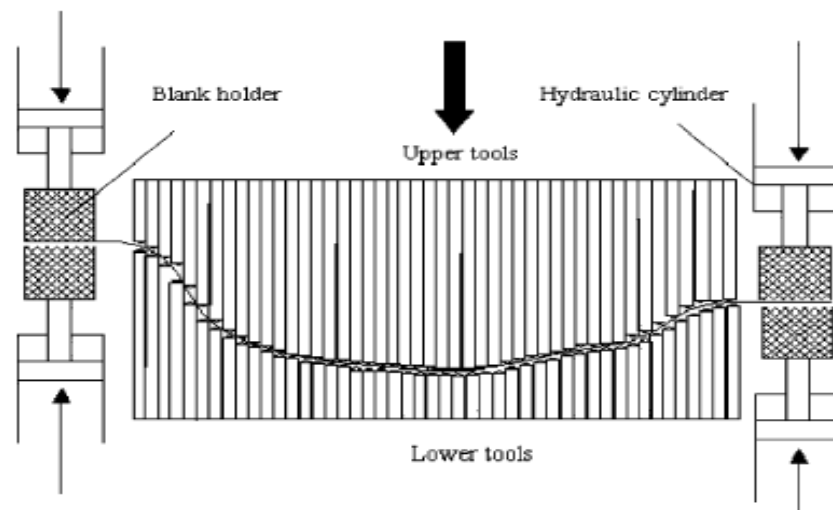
Metal sheet forming using programmed tools to form the sheet at multiple points [11]
